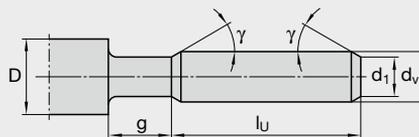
Preparing the workpiece with undercut (thread runoff)
